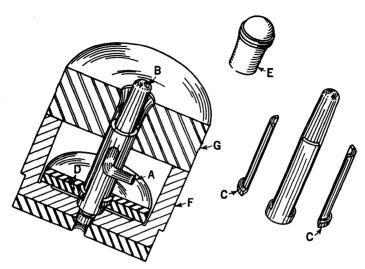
Split-sleeve ejector die. This method of ejection was employed because the thin walls of the casting would have been distorted by pressure from ejector pins.
